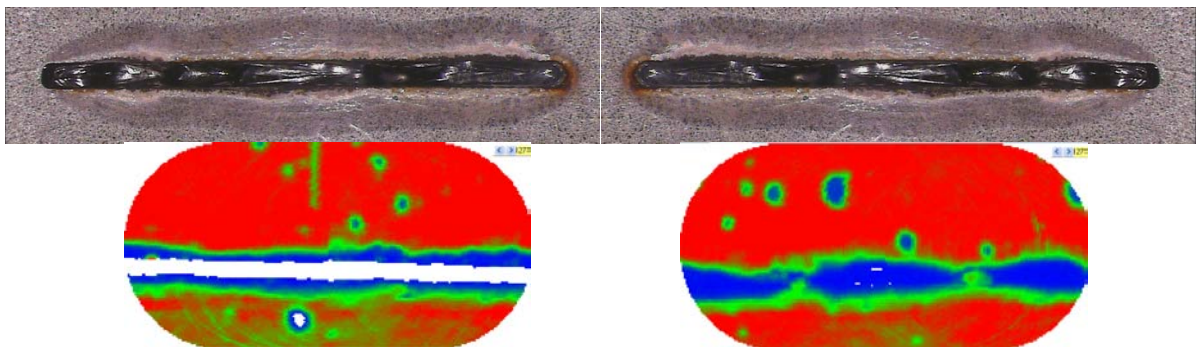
Weld top bead (0.4mm gap, sample A) and Amstech result from top bead (L) and bottom bead (R)
